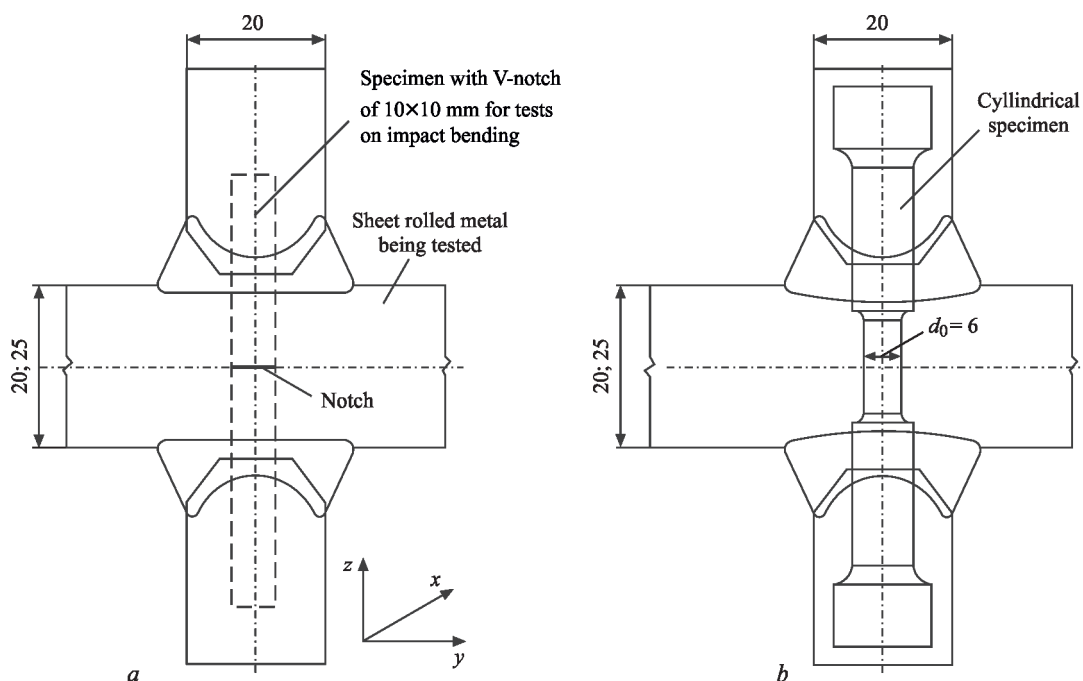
Scheme of cutting out specimens from cruciform welded joints: *a* — on impact bending with notches in the plane X–Y; *b* — on tension to determine the quality class of steel
